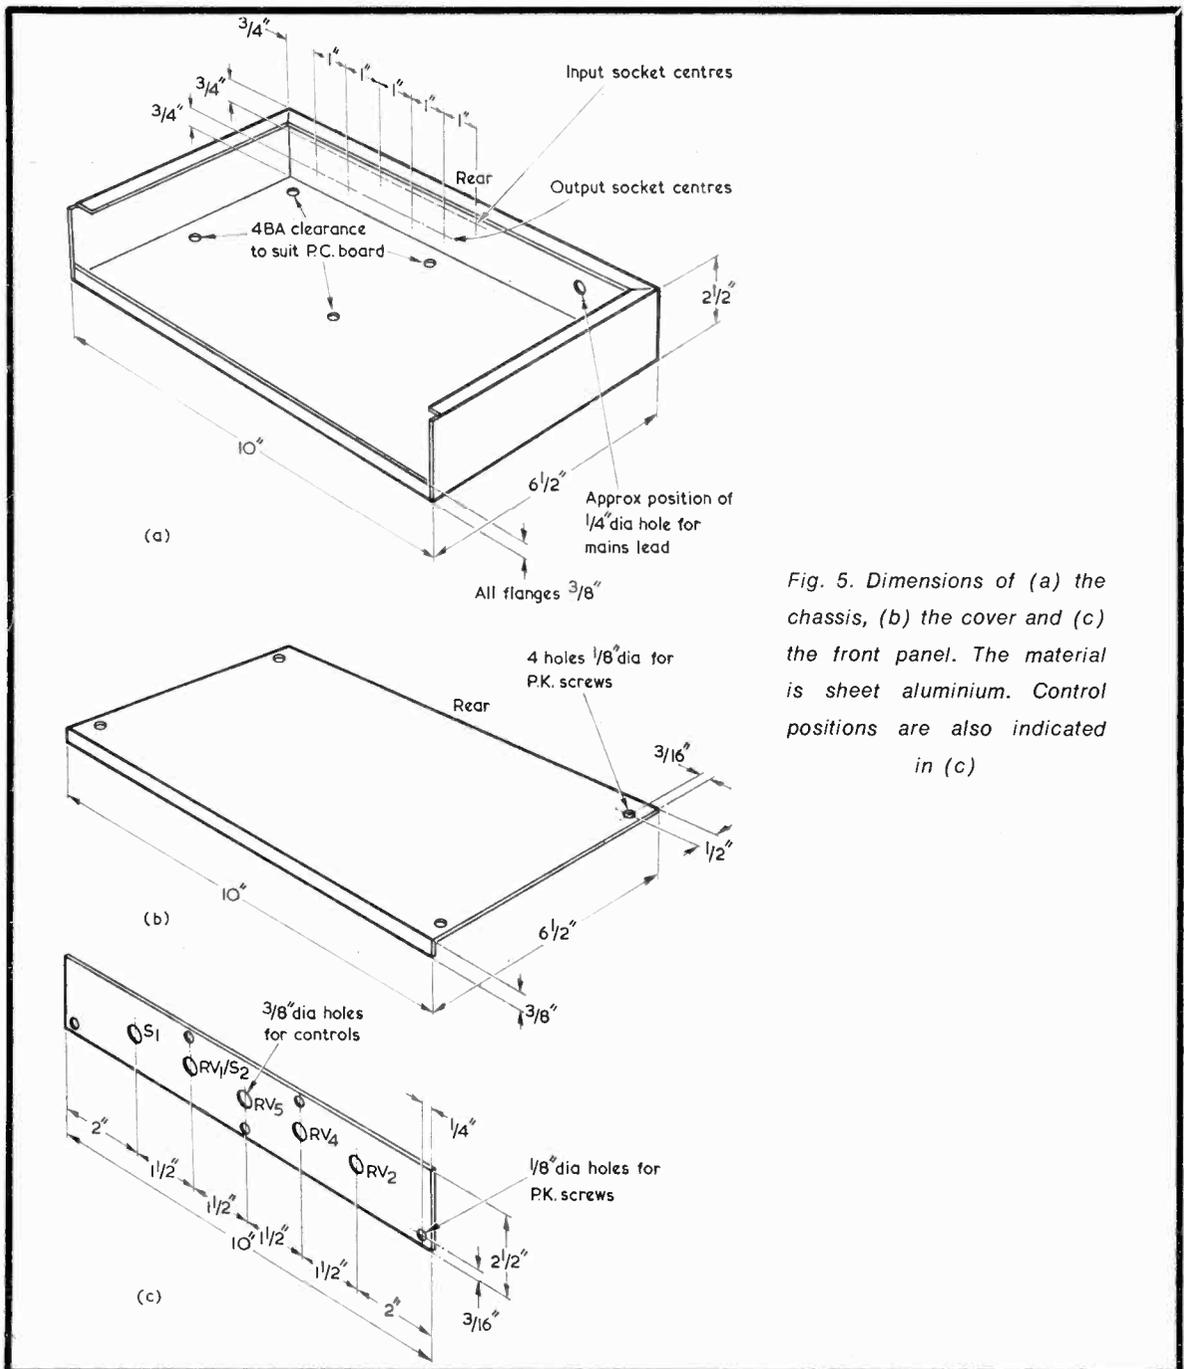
Dimensions of (a) the chassis, (b) the cover and (c) the front panel. The material is sheet aluminium. Control positions are also indicated in (c)
